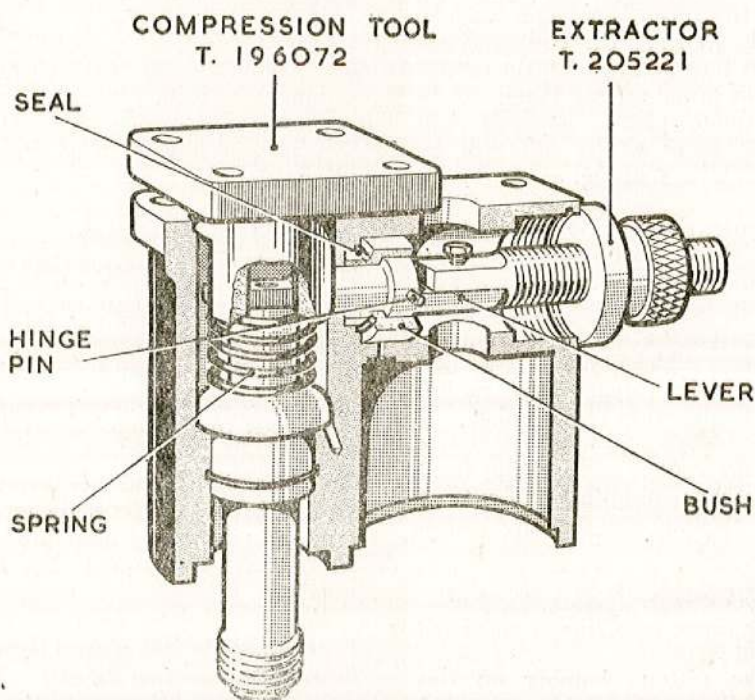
Withdrawing the servo lever from the fuel pressure control assembly
